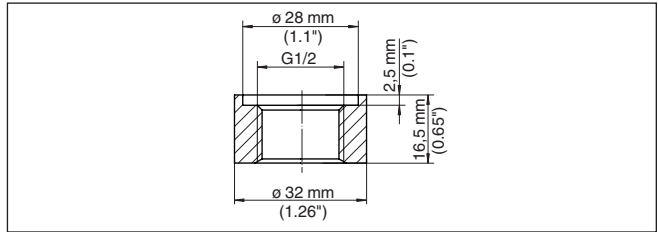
Dimensions of welded socket, thread G $\frac{1}{2}$  (DIN 3852-X)
